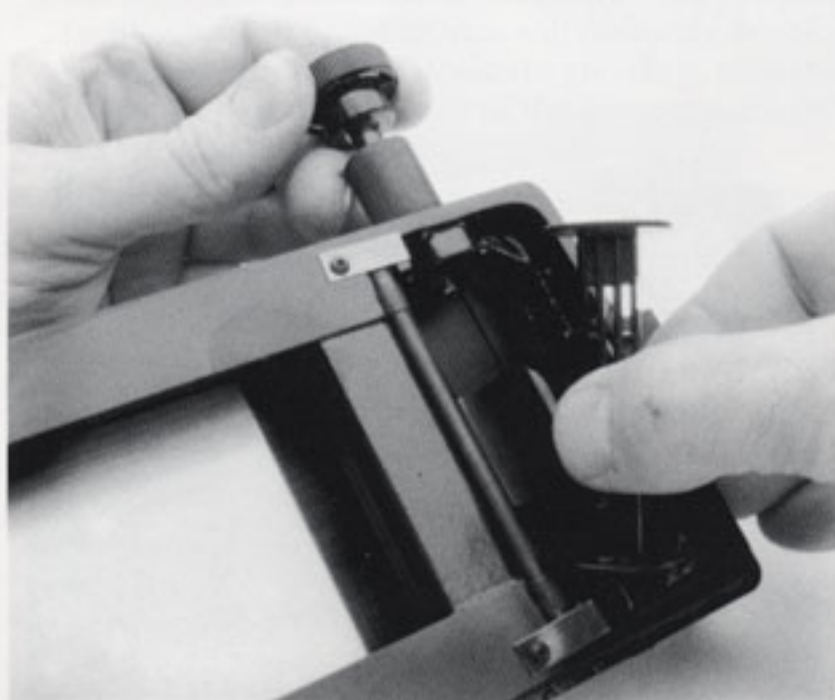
Install a 120 take-up spool in the film take-up compartment under the large film winding knob.
